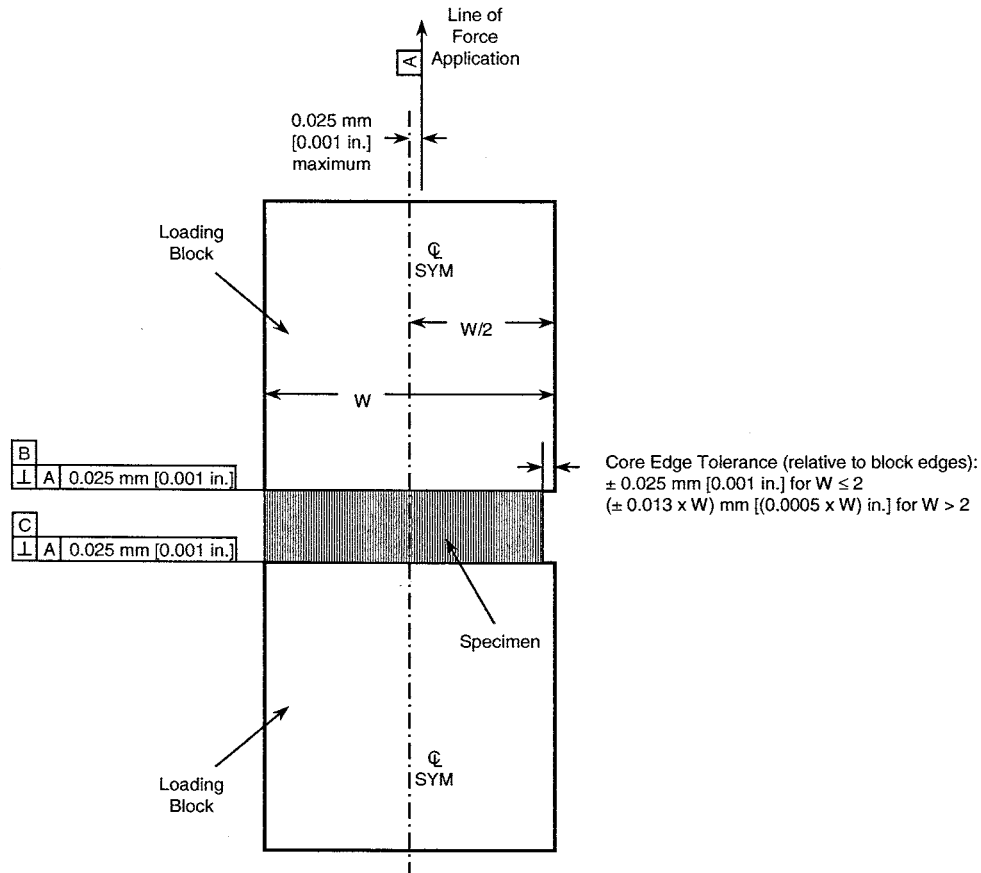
Permissible Bonded Assembly Tolerances
